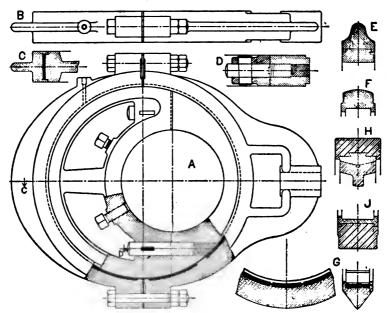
Eccentric for Corliss Engine, to fit shaft in Fig. 312 I. Scale 1 to 14. Sketches E to J, various sections of the eccentric-strap.
